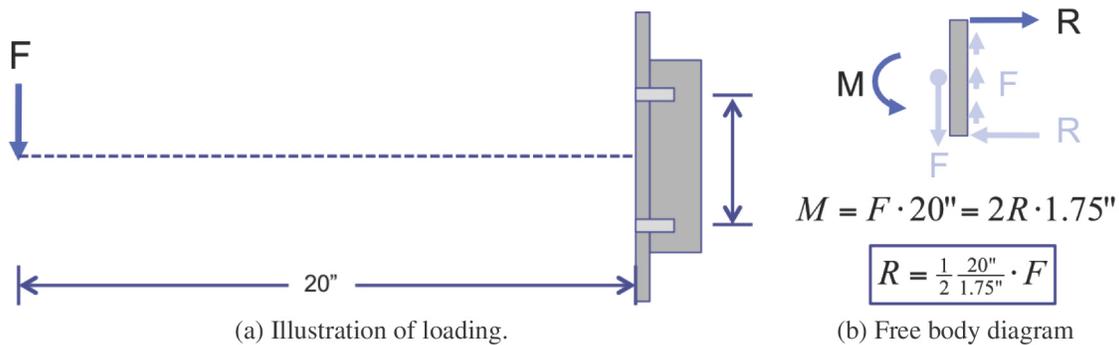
Illustration of heel-toe loading on tool clamp adapter-base plate interface.
